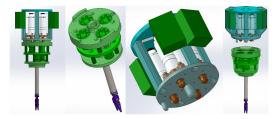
Left to right: the shortened RAVEN grasper attached to motorized interface; interface spindles of the tool and guide-pin holes; motorized tool link of the RAVEN-S arm with spring-loaded motor attachments, motor controllers, and guide pins; and the tool aligned for attachment.
